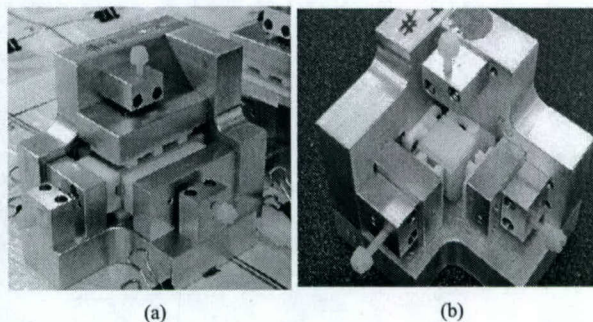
(a) Gluing jig with sandwich compressed in three dimensions. (b) Final PSSDA inside the jig with the top compression piece removed.
